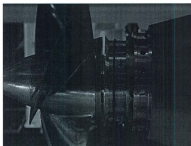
Both pressure plate adaptor pieces installed with o-ring in position.
